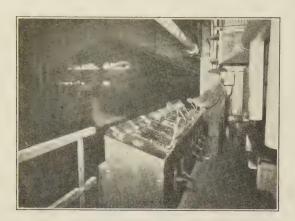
CONTROL PULPIT, HOT STRIP MILL
